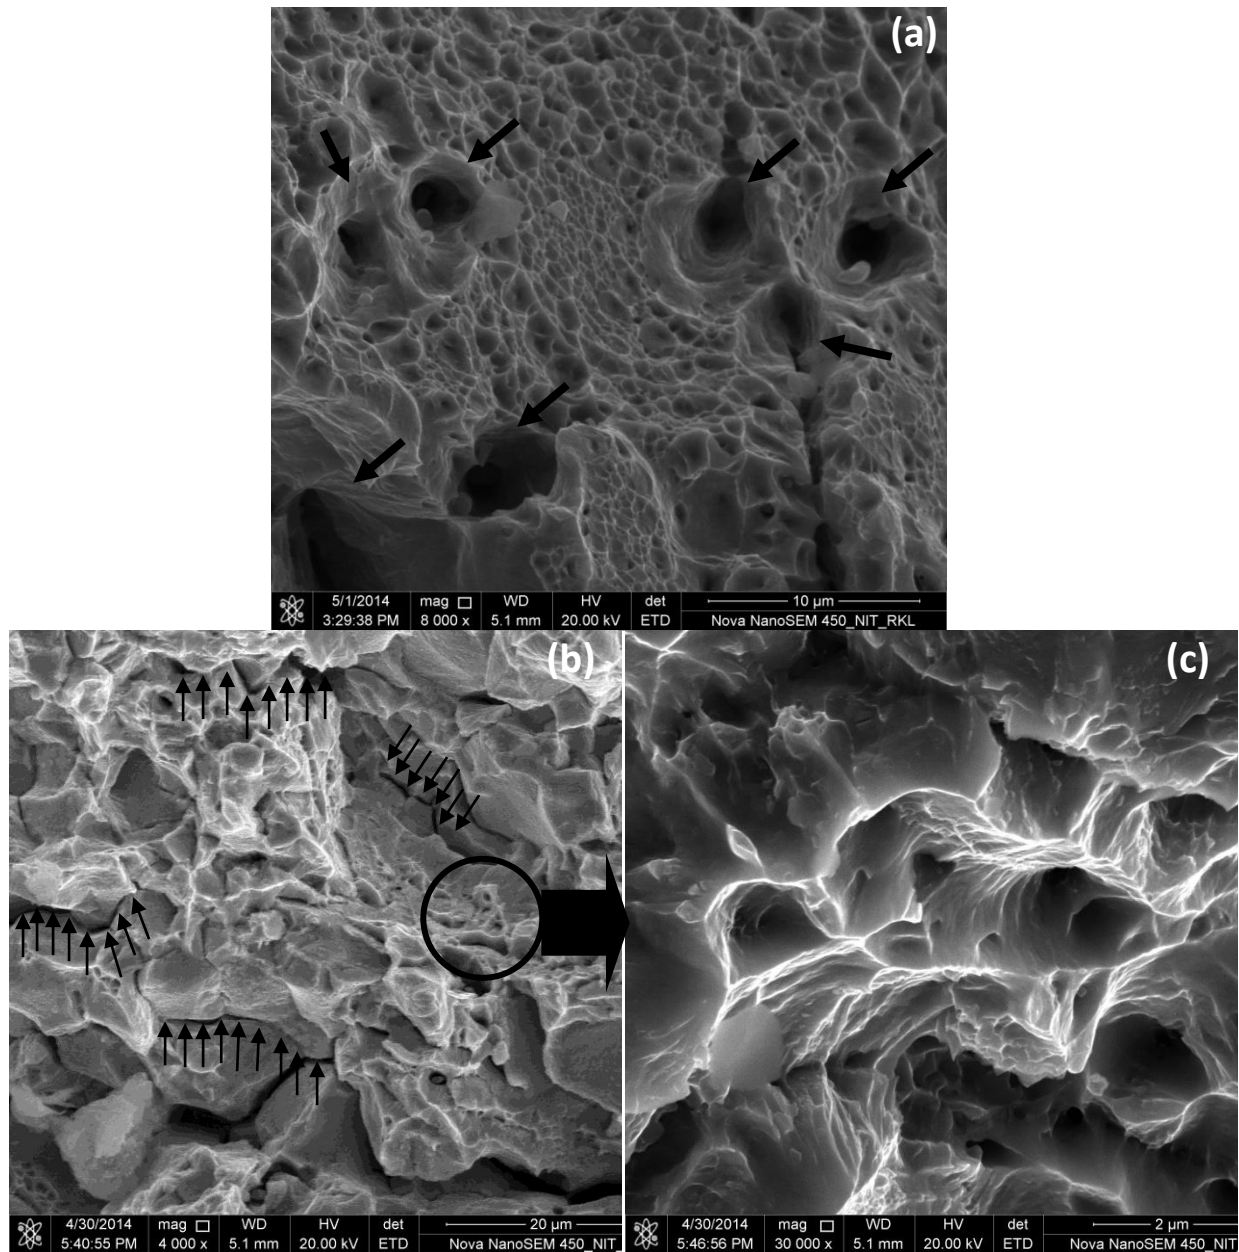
(a) A typical tensile fractograph of solution annealed non-conventional stainless steel showing classical dimples, (b) typical fracture surface of the sensitized (1 hr) stainless steel fractured during post-fatigue tensile test (the arrow marks are showing intergranular crack propagation) and (c) dimples present at few places of the 1 hr sensitized specimen taken at higher magnification (circled part of figure b).
